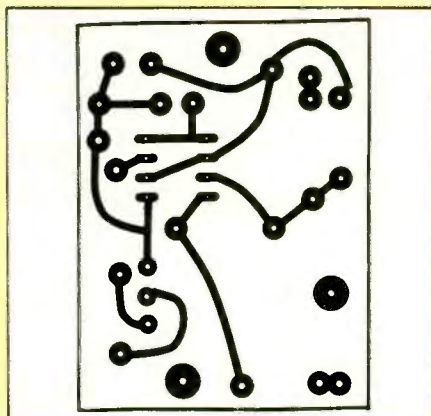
Actual-size printed-circuit etching-and-drilling guide.
